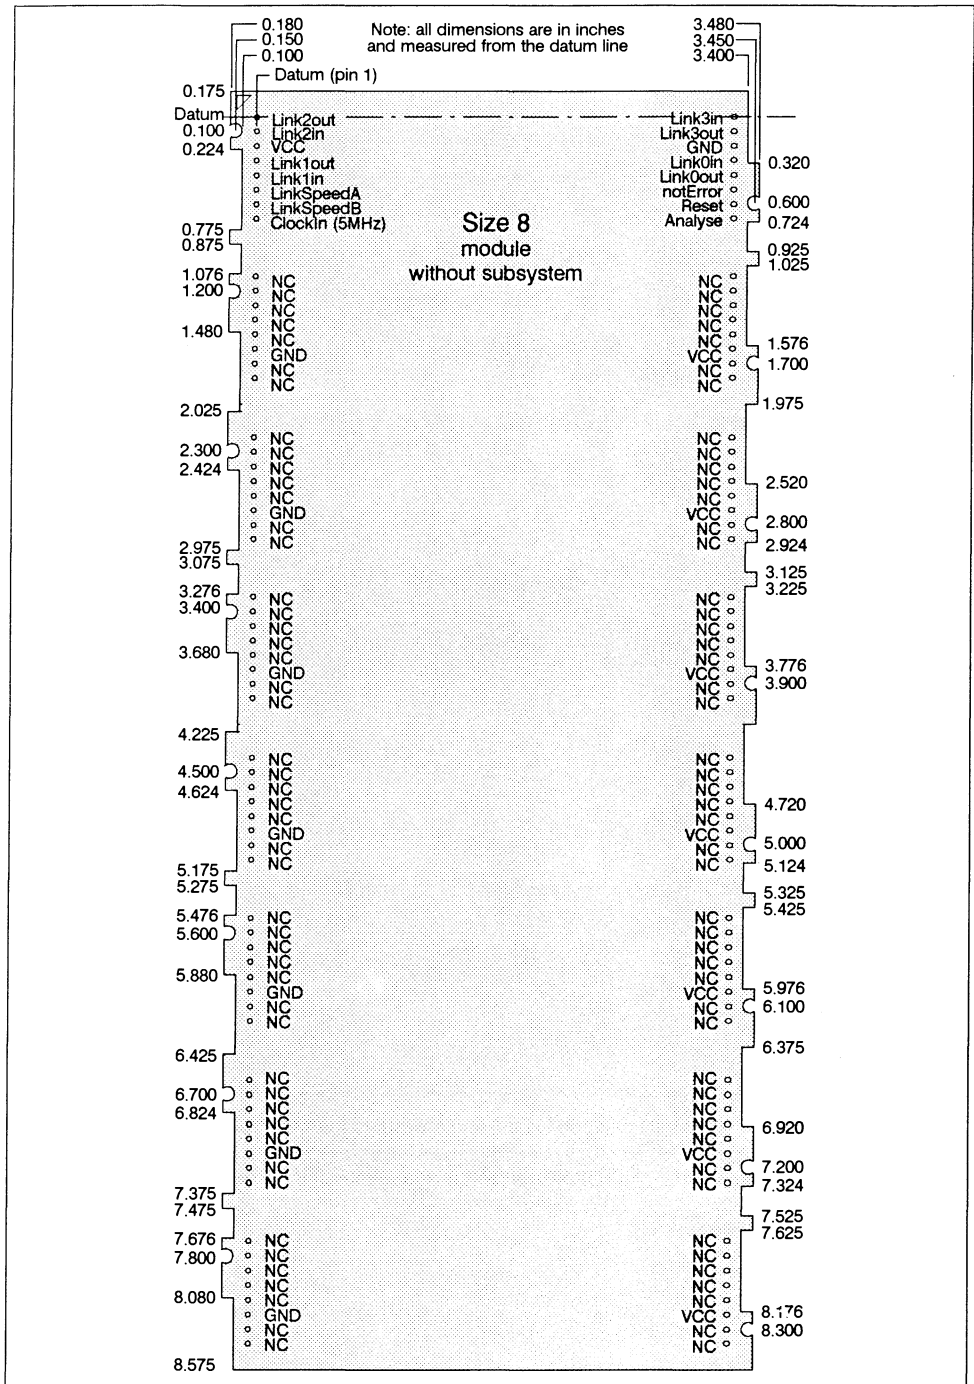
PCB profile drawing and pinout, TRAMs Size8 without subsystem
